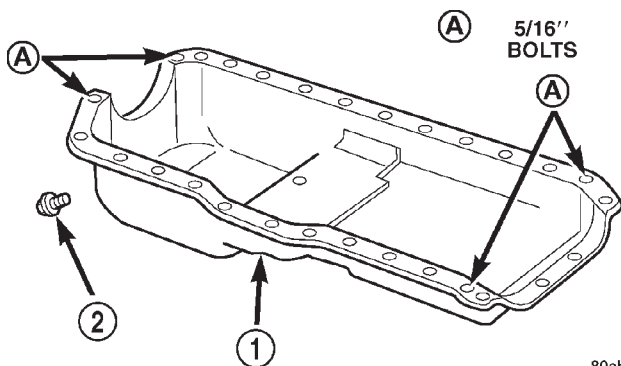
Position of 5/16 inch Oil Pan Bolts
